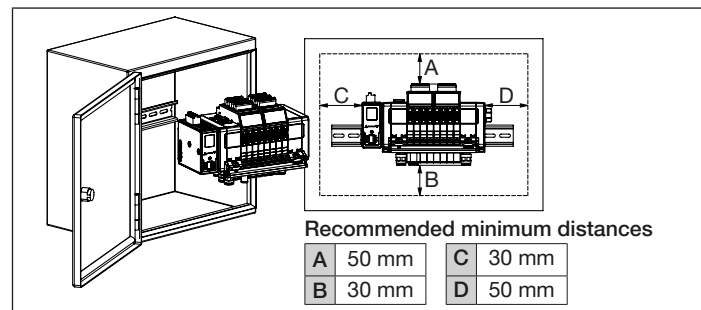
Recommended minimum distances for assembly on standard rail in the control cabinet
